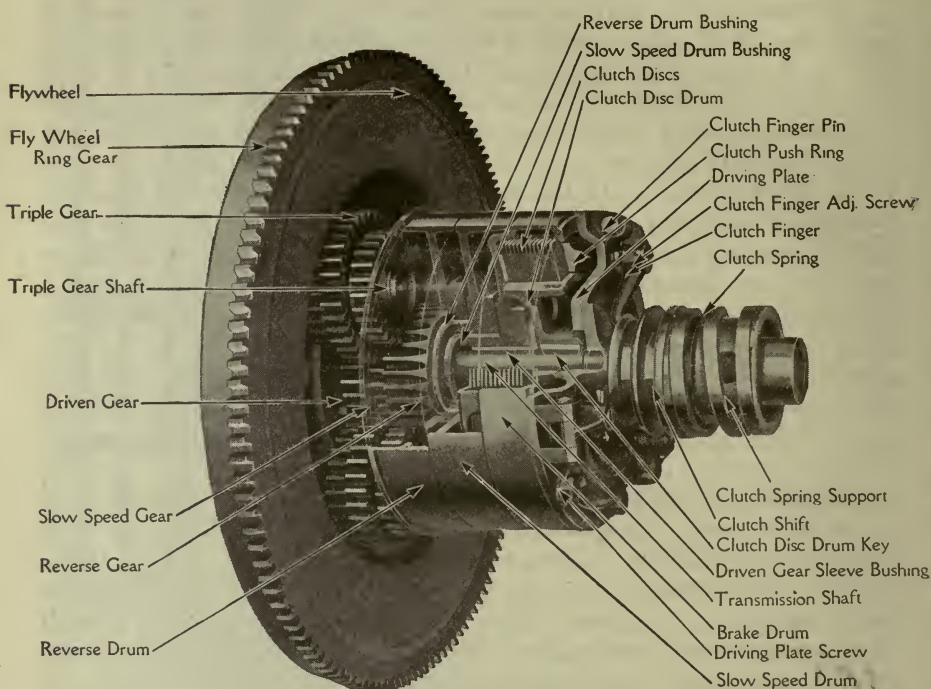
Ford Planetary Transmission showing drums, gears, clutch and other parts.
